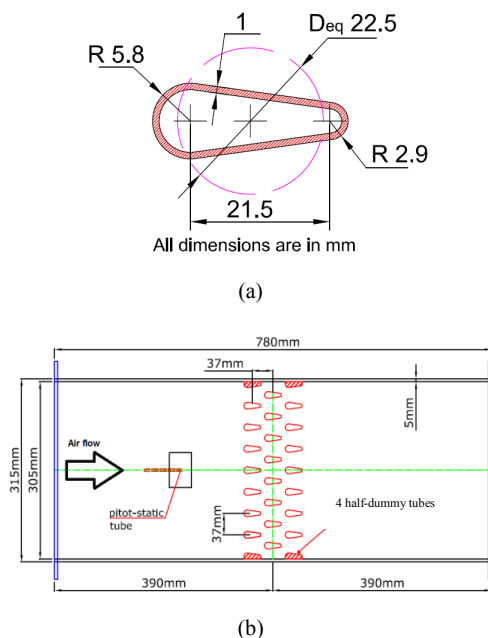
(a) Wing- Shaped Tube Cross Sectional Dimensions (b) Schematic Plane of the Test Section, $\theta_{1,2,3} = 0^\circ$, (Case 1)
